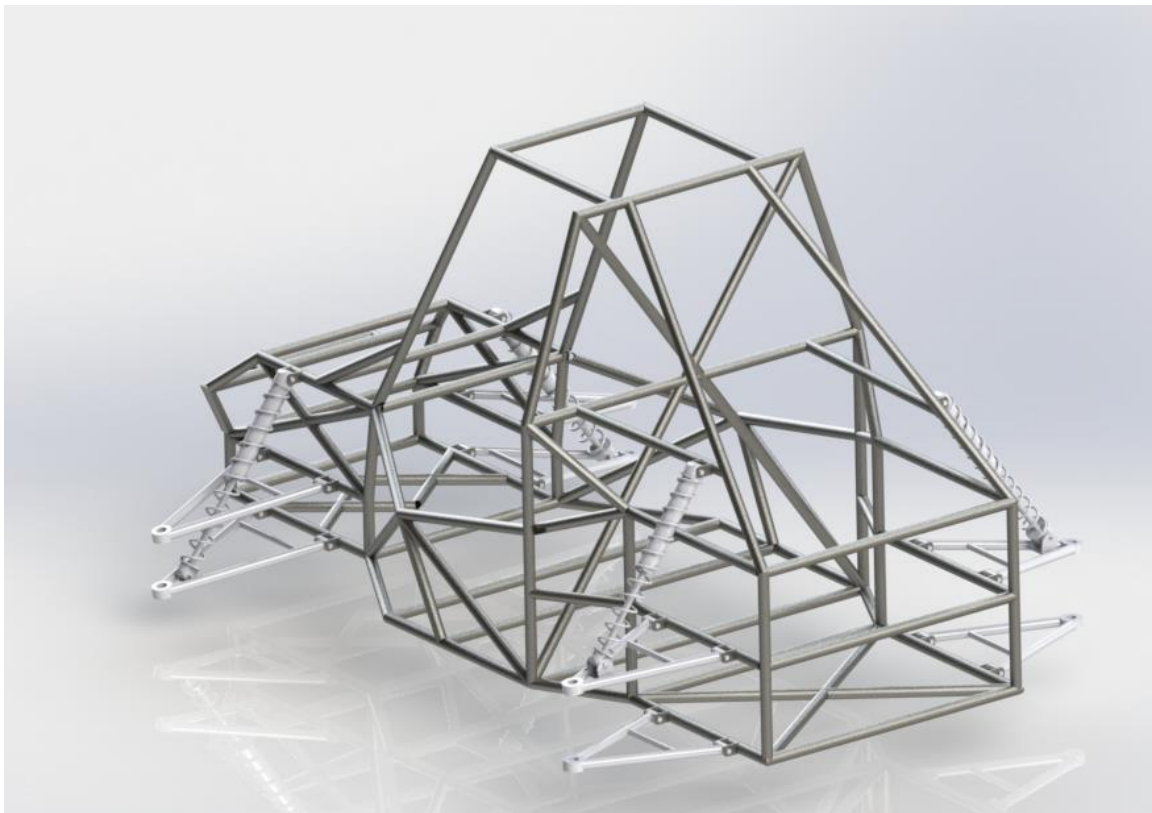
Isometric view of Baja showing suspension system mounted on chassis
